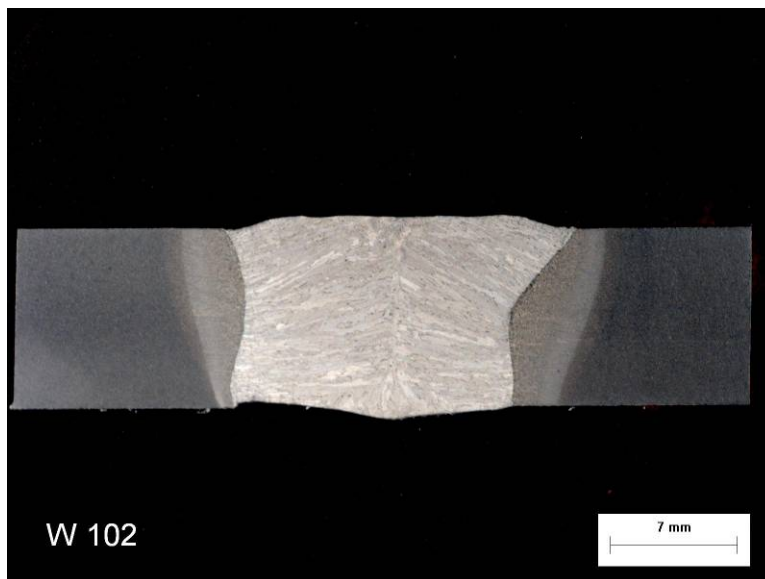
Weld with 10-mm Procedure and 6.0-mm Root Opening
